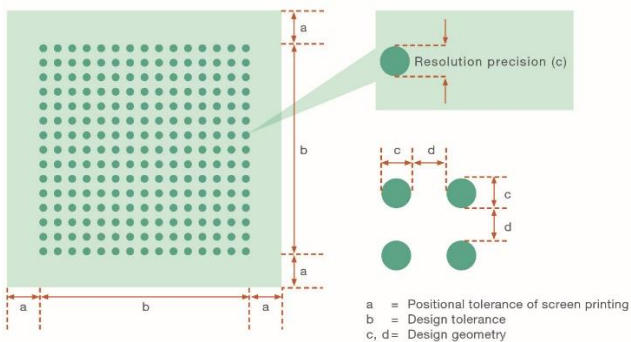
Position and design tolerances for measurement with printed glasses
